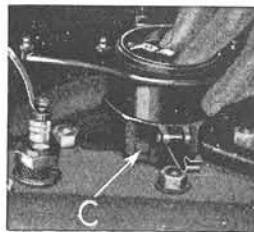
(left). Distributor body and rotor replaced. Rotor arm is turned opposite No. 1 high-tension contact in distributor head.
